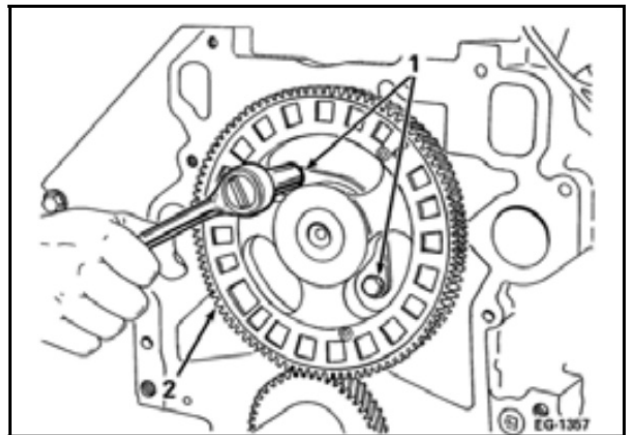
Removing the Cam Gear Thrust Plate Mounting Bolts
